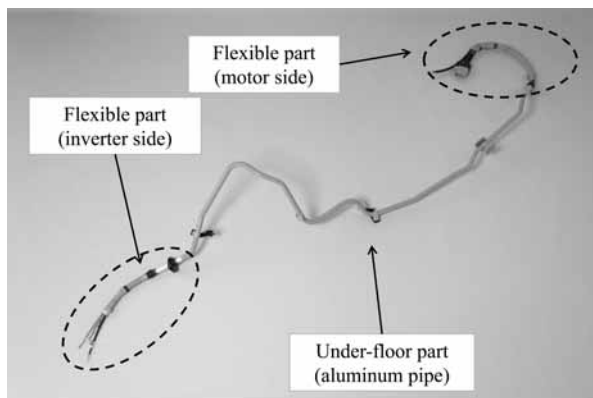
The appearance of an aluminum pipe shielded high-voltage wiring harness
